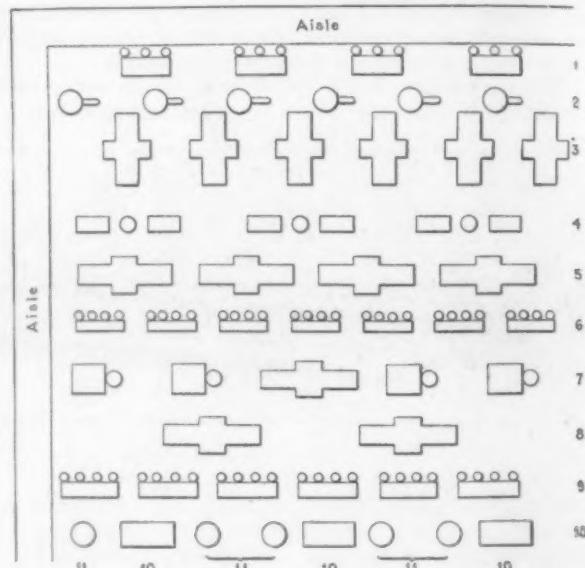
Sequence Arrangement of Machines in Cylinder Department, Ford Motor Company
